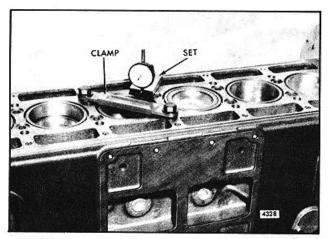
Checking Distance of Liner Flange Below Top Face of Block
